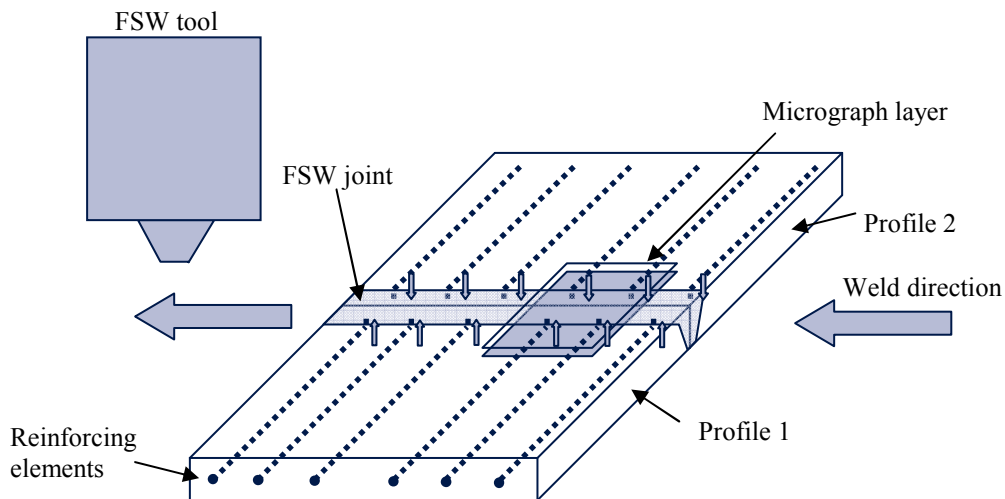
Deformation of reinforcing elements during the welding process
